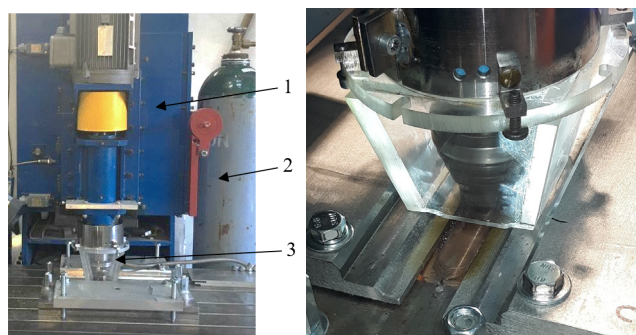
FSW-IG system, detail FSW-IG welding of Cu 99 [13]
